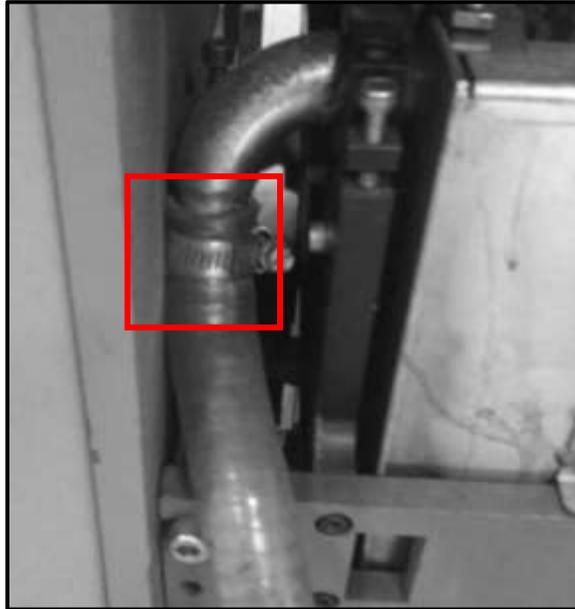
Connecting Water Tub Inlet Pipe to the Jetting Nozzle Pump
